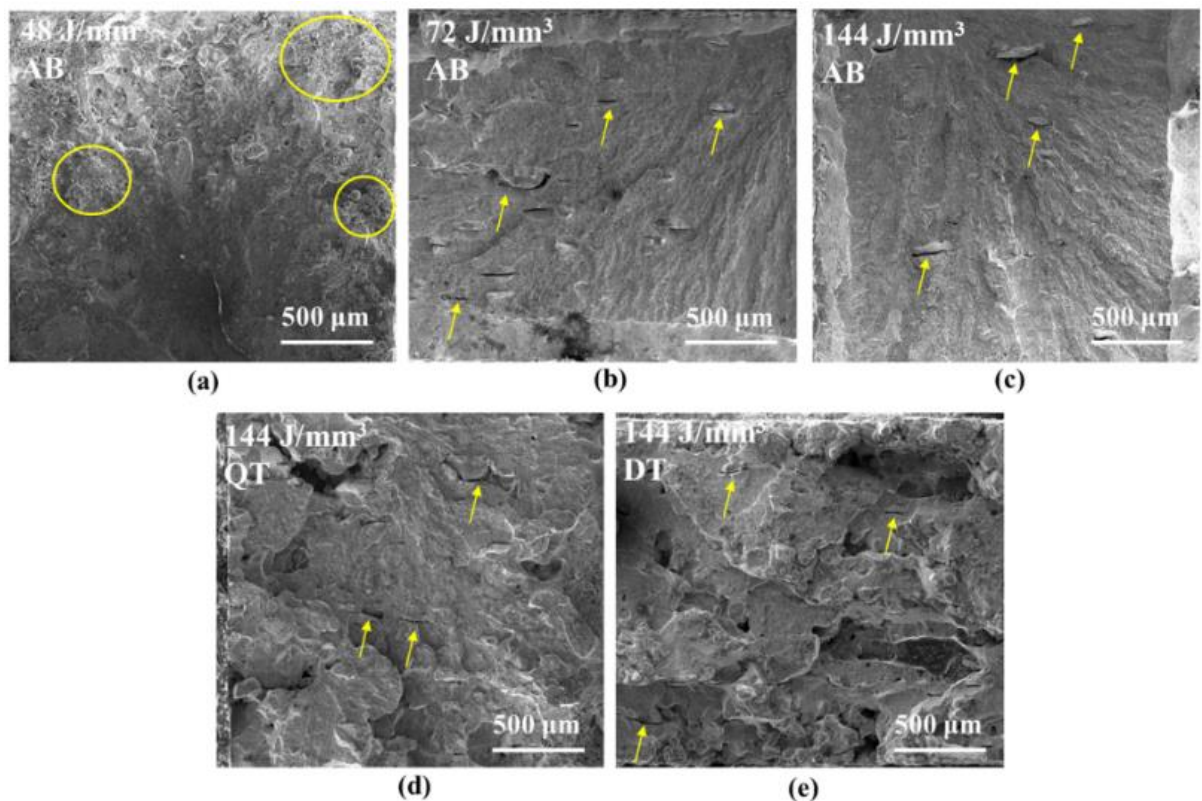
Fractographs of fractured specimens obtained during tensile testing.
